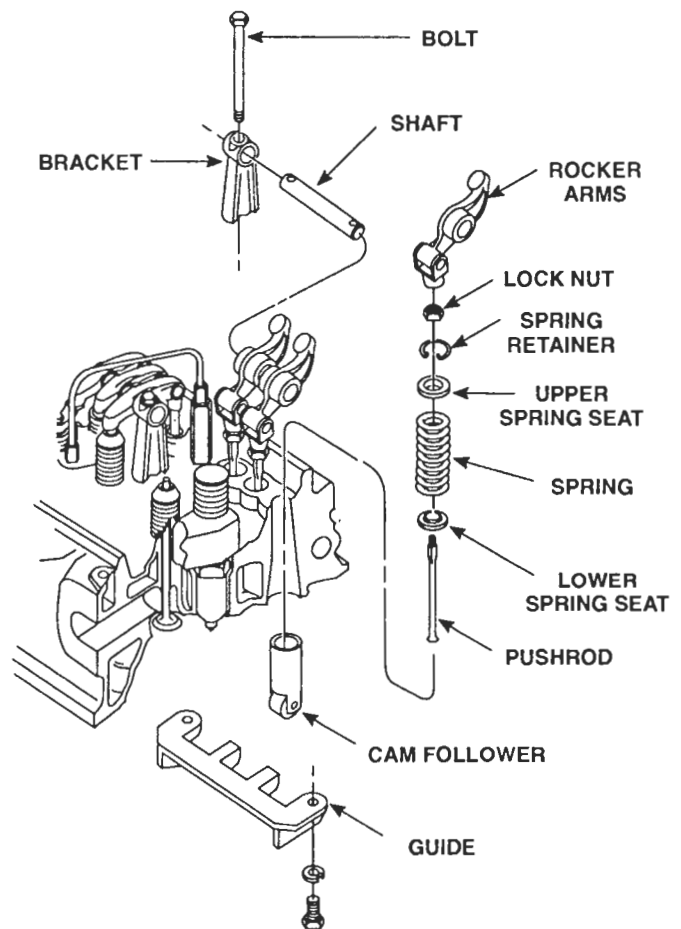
Valve and Injector Operating Mechanism and Relative Location of Parts
